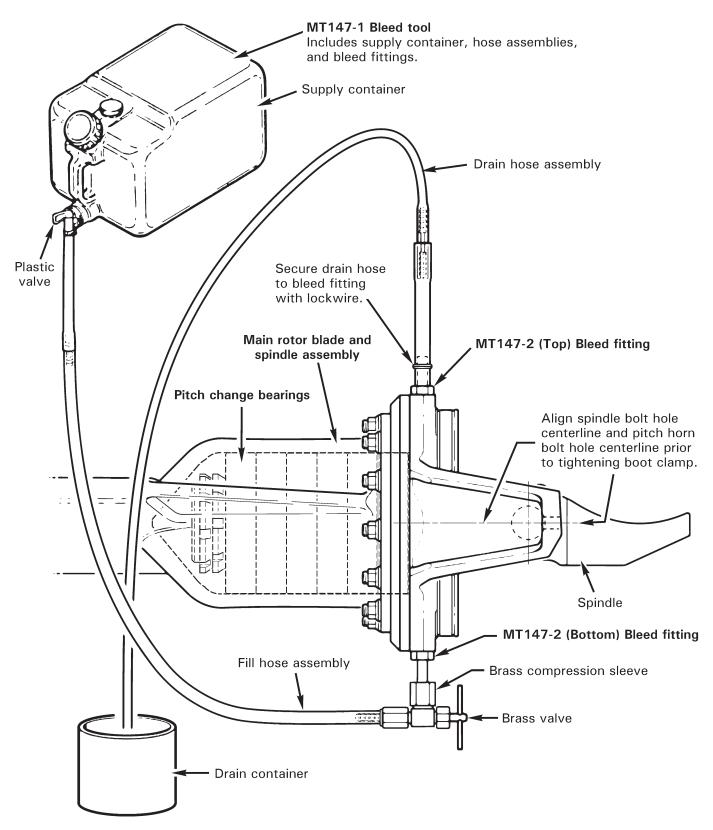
FILLING PITCH BEARING HOUSING
